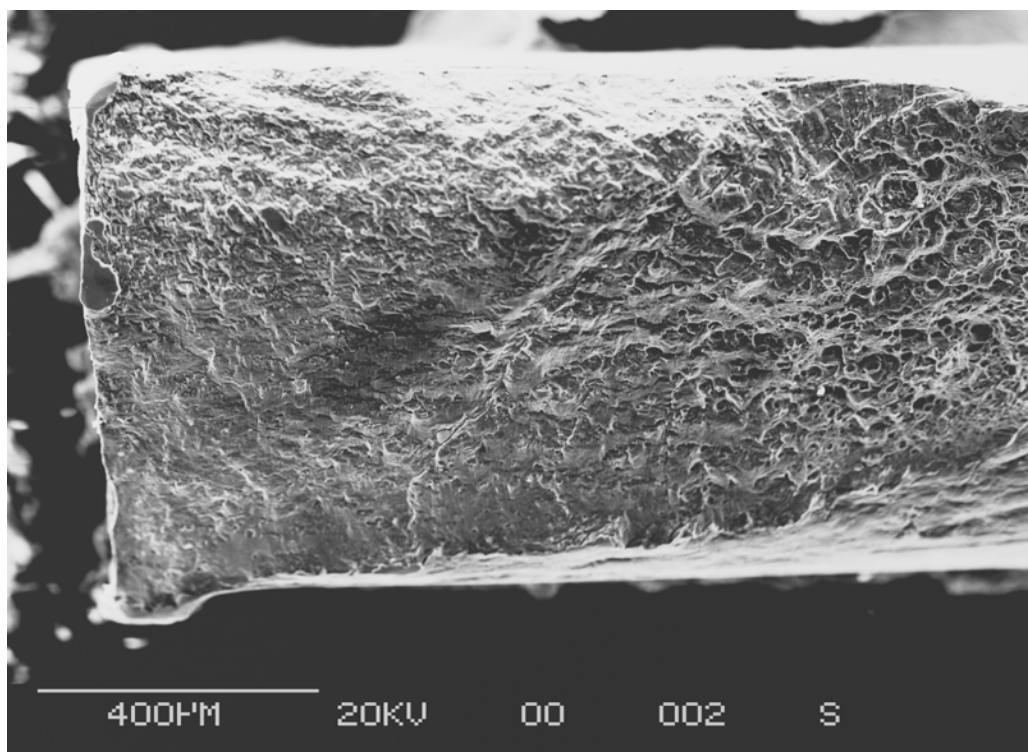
Fatigue Crack on Fracture Surface of Specimen 5608.
